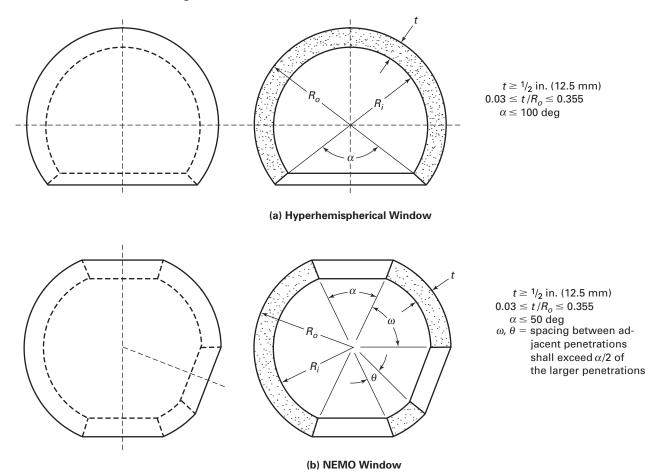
Standard Window Geometries – Part 4
